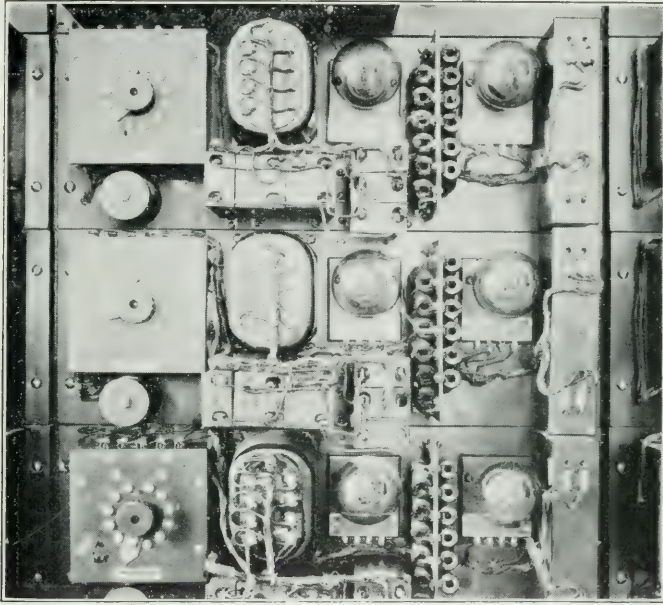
Assembly of Four-Wire Repeater Apparatus
